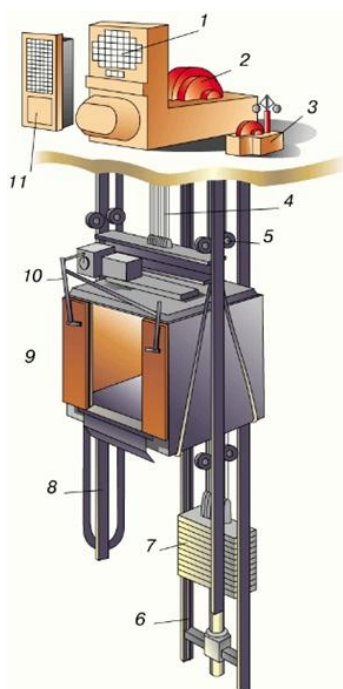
Elevator design with electromechanical drive: 1 — electric motor; 2 — winch; 3 — speed limiter; 4 — traction ropes; 5 — guide rollers of the cabin; 6 — counterweight guides; 7 — counterweight; 8 — cab guides; 9 — cabin; 10 — door mechanism; 11 — control panel
